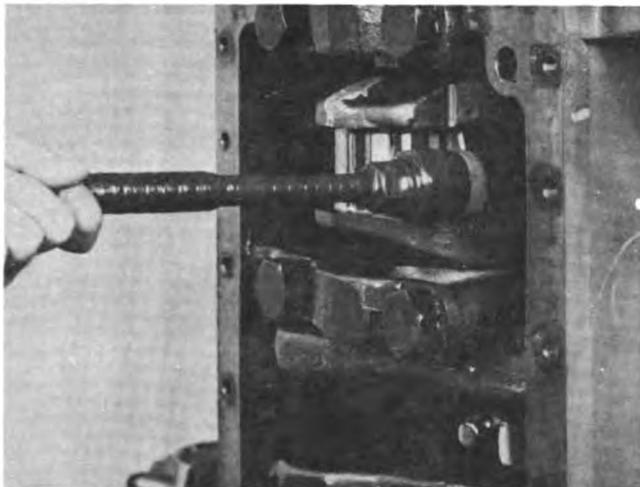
(N100154). Remove The Connecting Rod And Piston Assembly.
